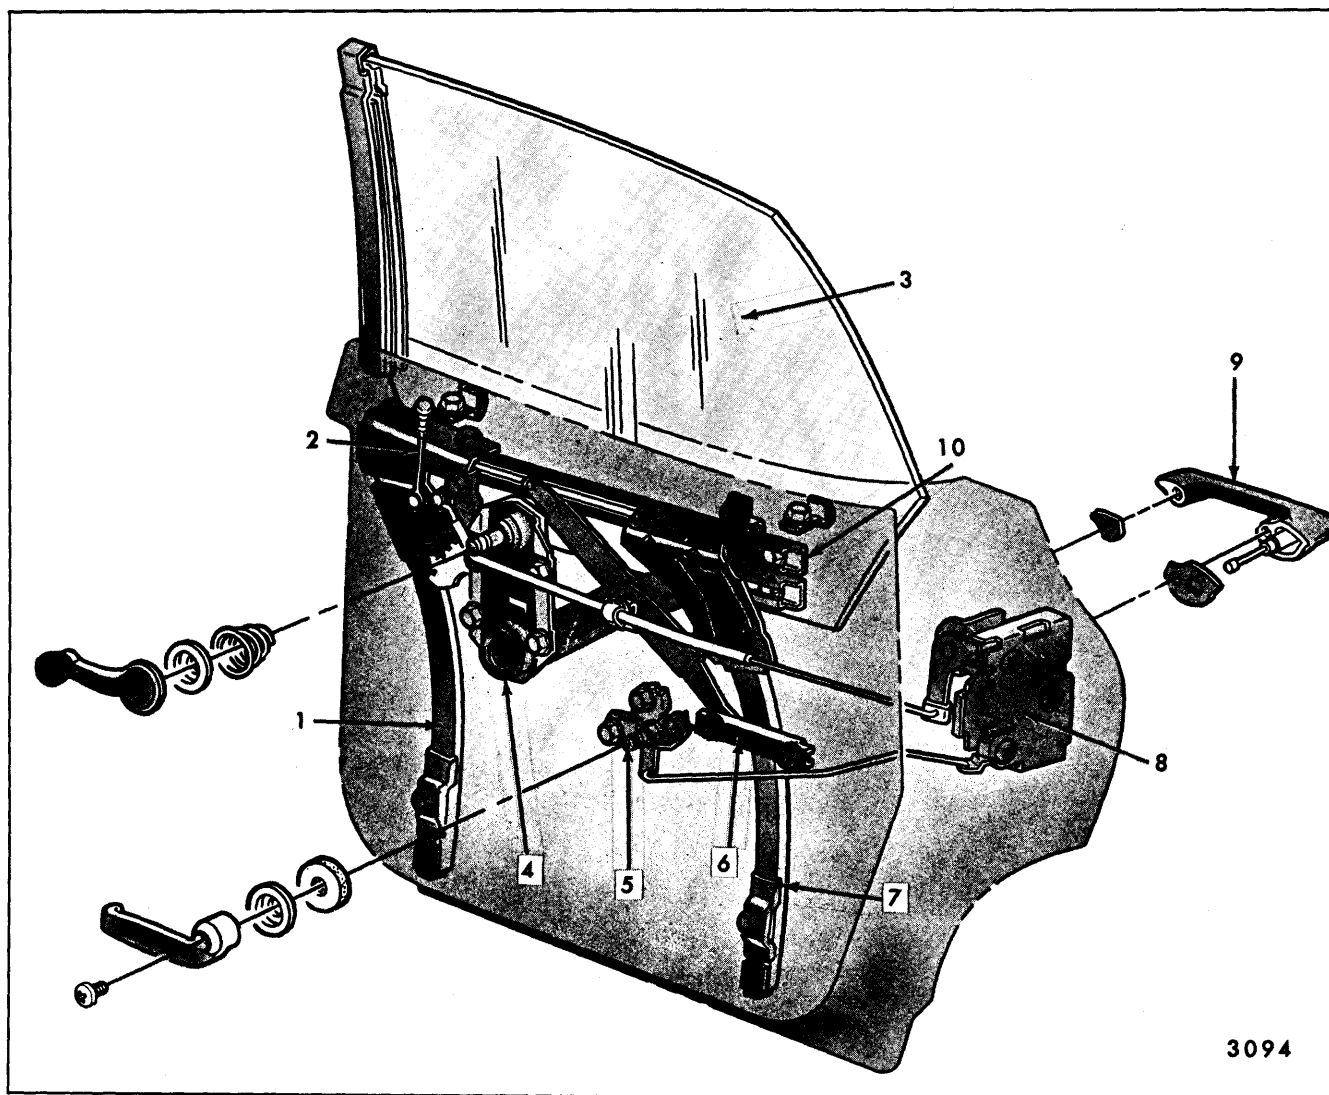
Rear Door Hardware - "A-39" Styles
